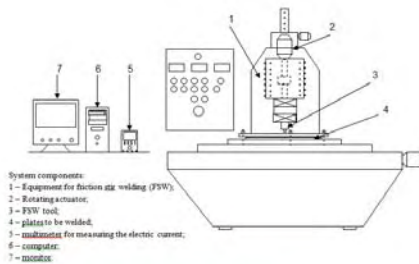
System for real-time monitoring of the friction stir welding process - FSW
